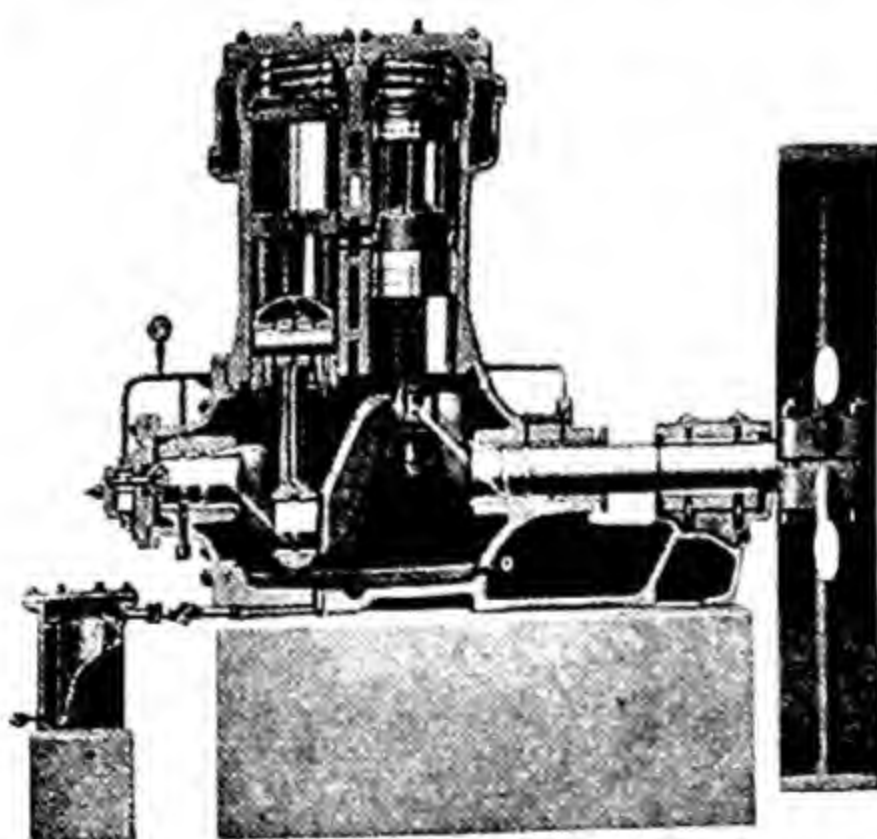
Cross-Section Enclosed Vertical Compressor with Force-Feed Lubrication System.
